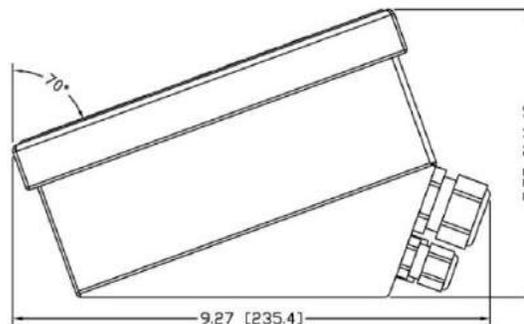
Harsh Environment Enclosure Dimensions, Side
